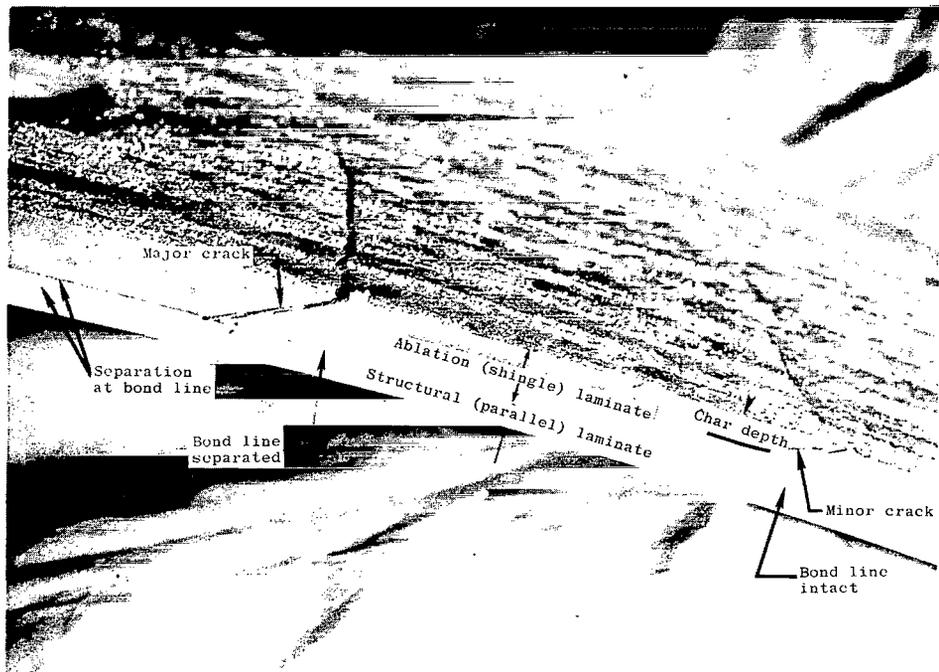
Cross-section view of heat shield showing major cracking of ablation laminate and separation at bond line.
